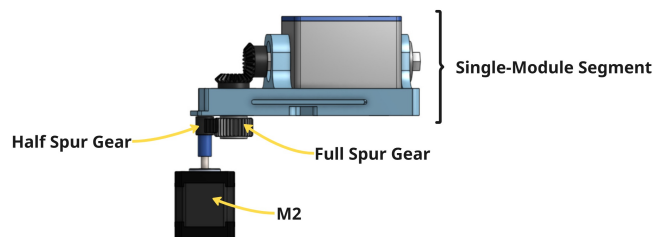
Side-view CAD render of the engagement mechanism. The half spur gear on M2's shaft (bottom) contacts the full spur gear on the container face (top). The toothed arc drives the auger; the toothless arc provides mechanical cutoff.
